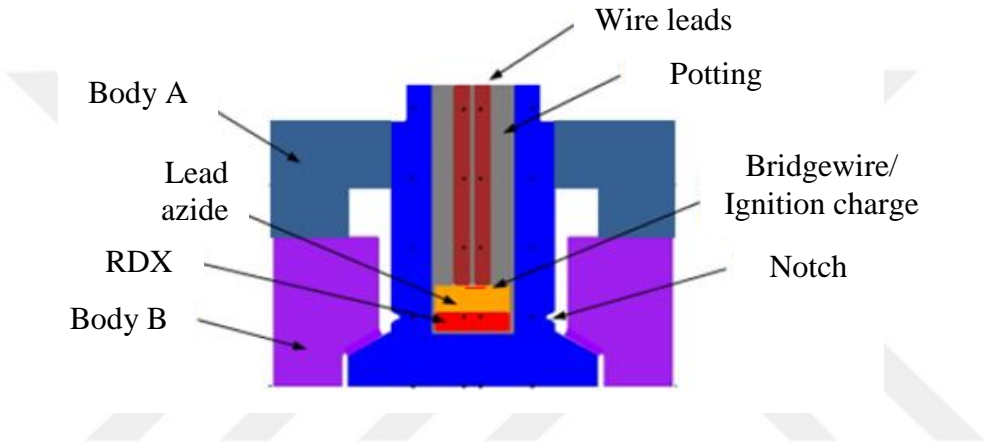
The given cross-sectional view of ridge-cut explosive bolts contains high explosives as RDX and Lead Azide. They are activated after igniting the charge [8].
